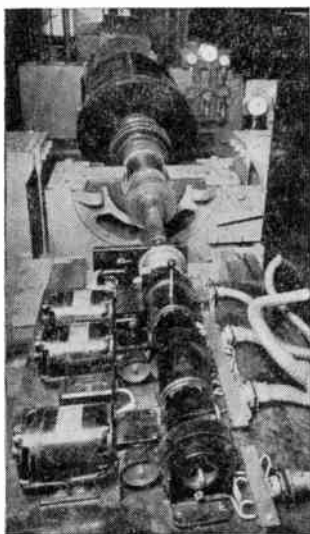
Dynamic balancer for rotors up to 40 tons showing the calibrating generators in front, spring suspended bearings and 10-ton rotor between them.
